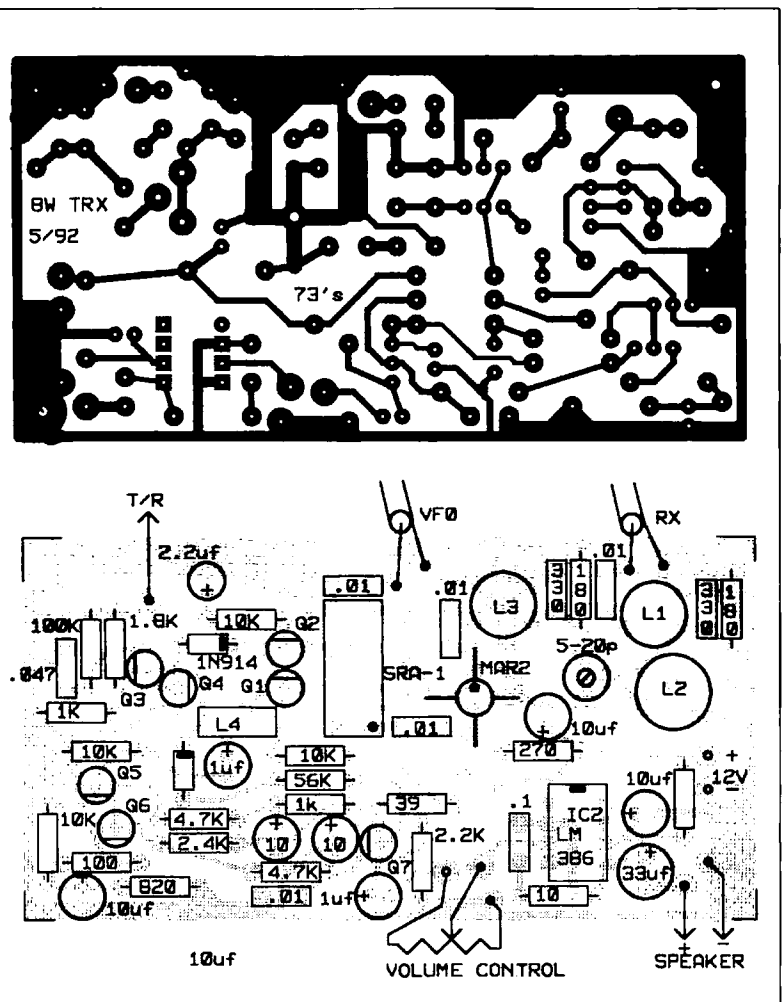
a. PC board foil pattern for the receiver board. b. Parts placement.
